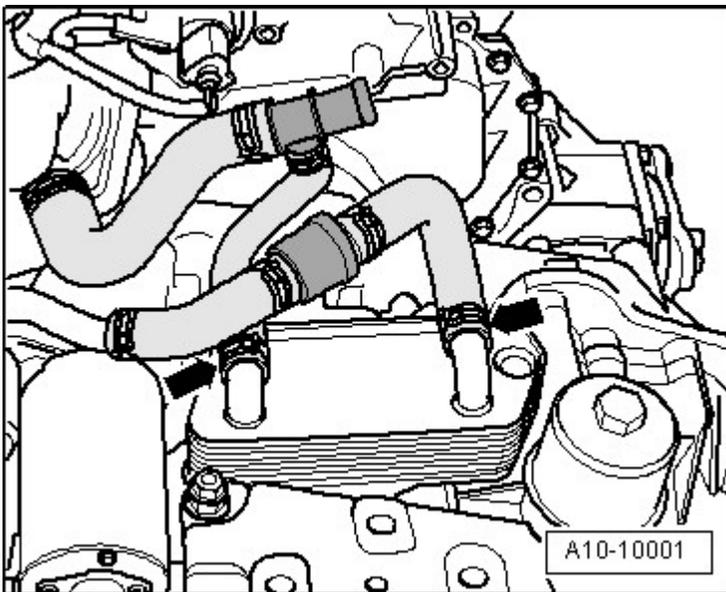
Identifying Transmission Oil Cooler Coolant Hoses And Clamps
